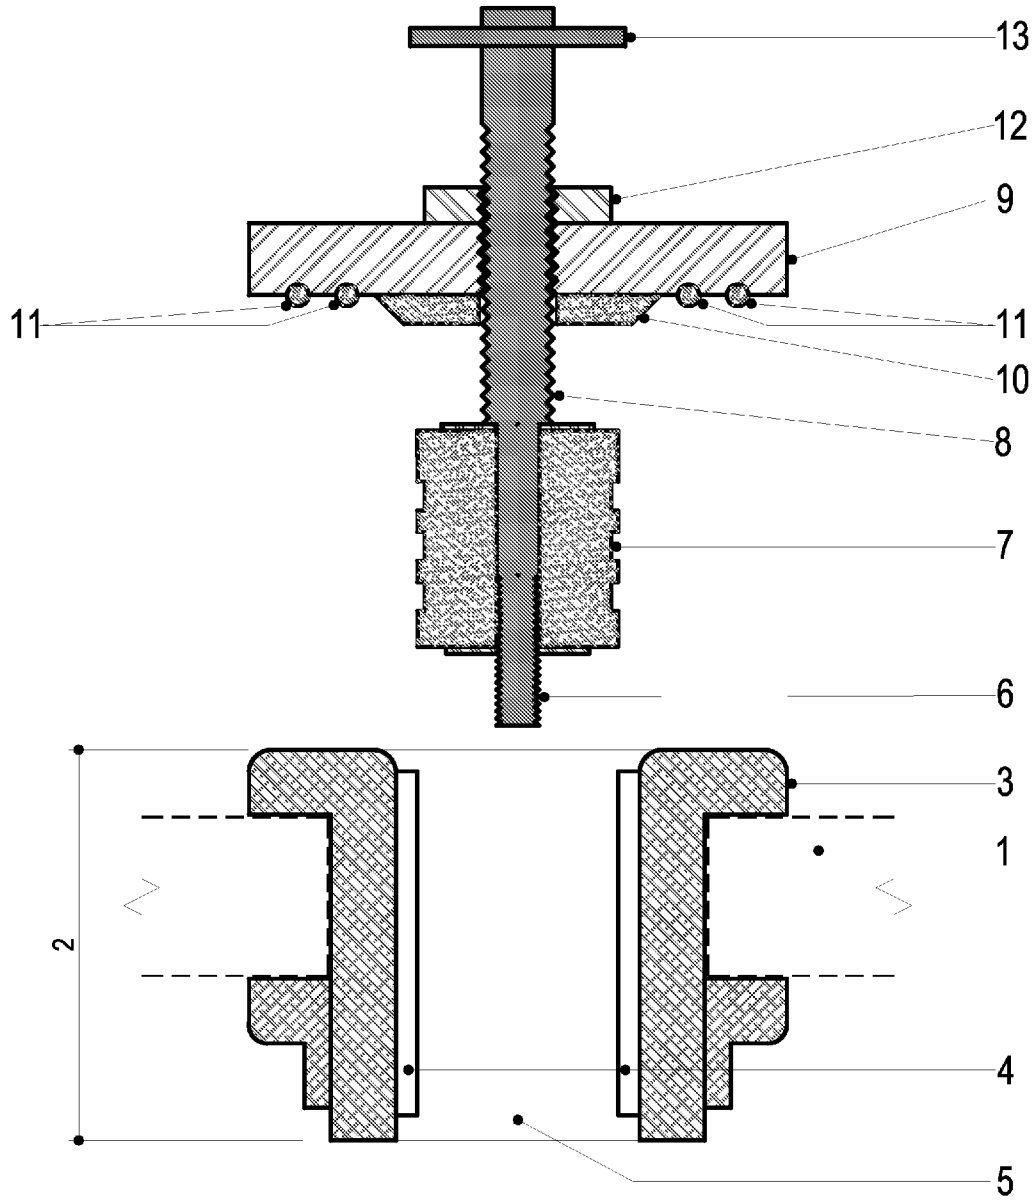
SEACOCK PLUG UNASSEMBLED
